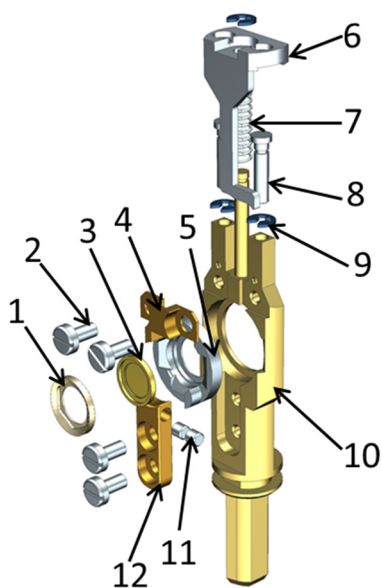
(1) AutoGrid holder, (2) Screw M1x2, (3) AutoGrid, (4) Bushing retainer, (5) Rotating bushing, (6) Holder handle, (7) Spring, (8) Rod, (9) C-clip, (10) Holder base, (11) Magnet, (12) Bushing holder.
